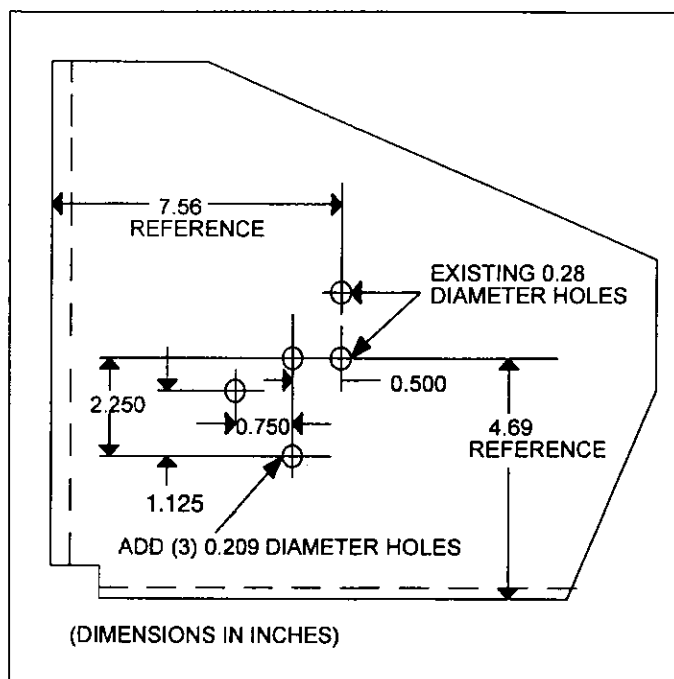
Flux Shifter Mounting Hole Pattern
